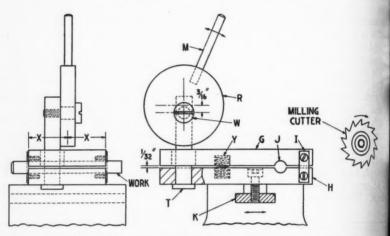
Assembly Drawing of Cross Slide Fixture for Milling Flat on a Shaft Section
